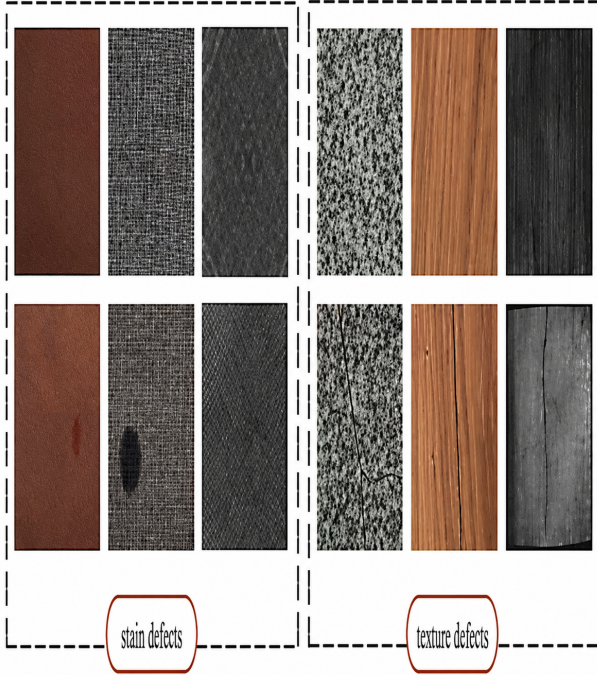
Examples of stain and texture defects on industrial surfaces.
